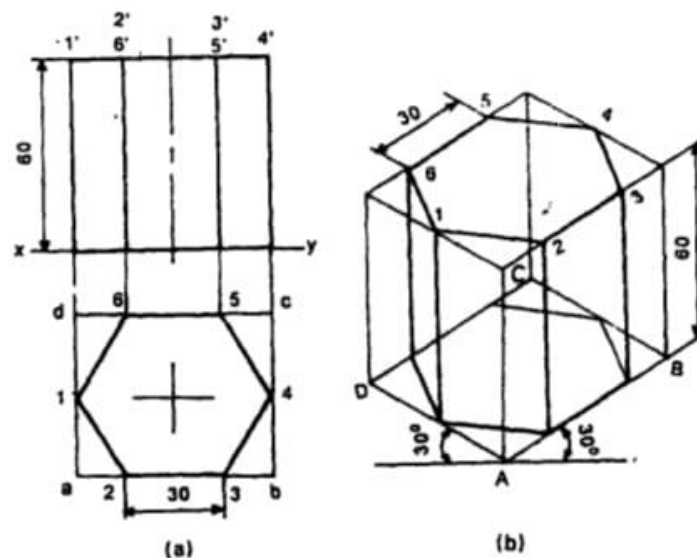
Isometric Drawing of a Hexagonal Prism
